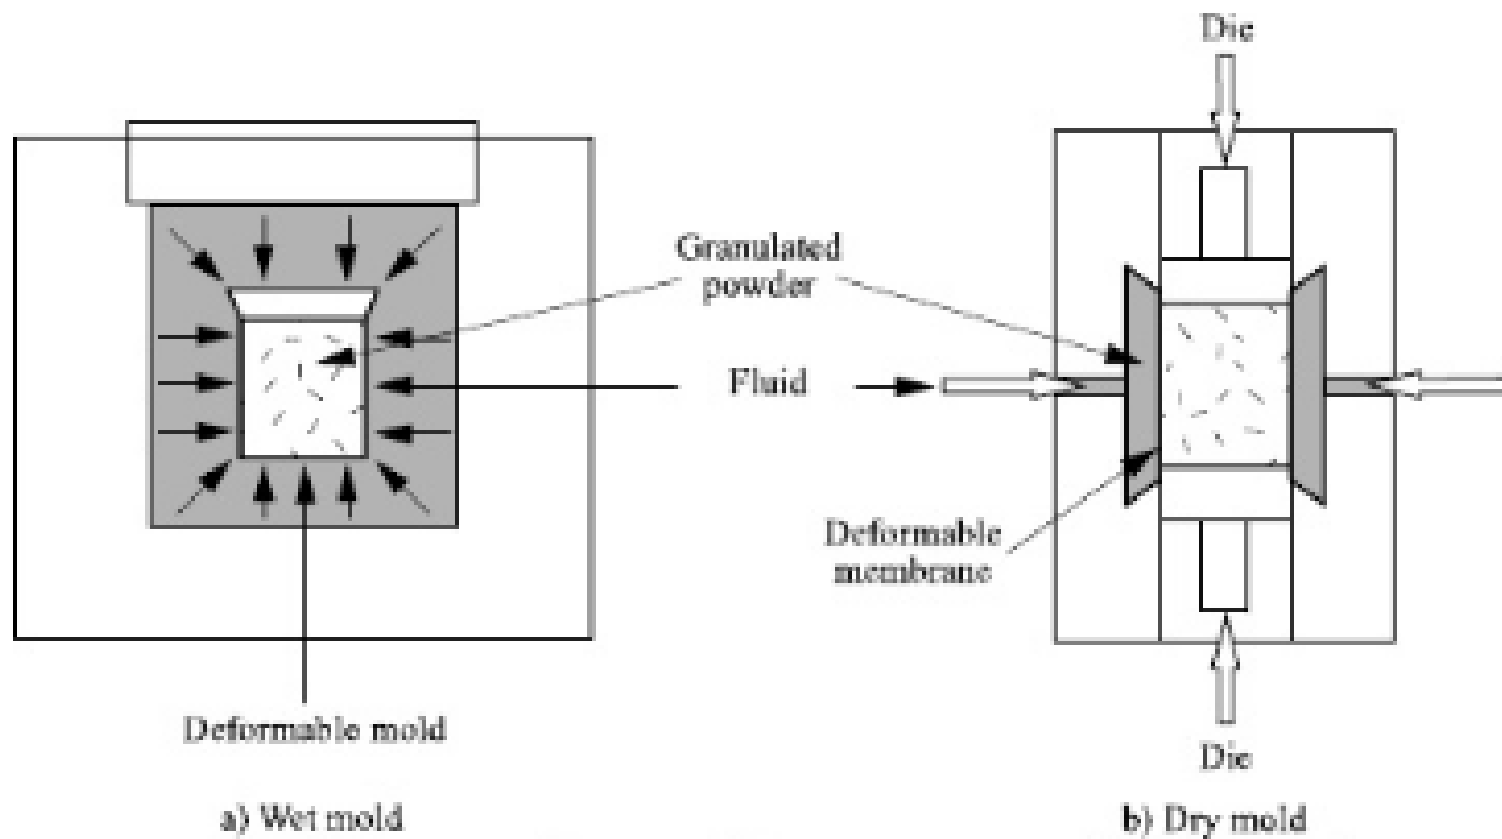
Principles of isostatic pressing: a) wet mold, b) dry mold
